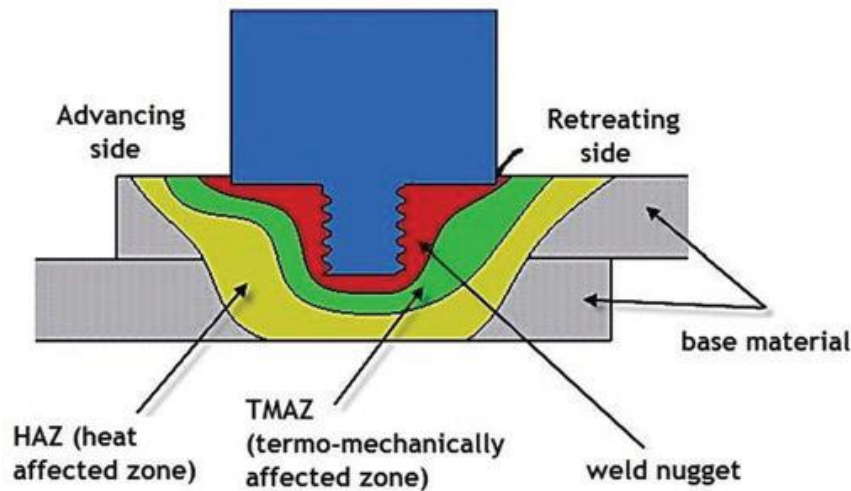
Weld zones in lap joint obtained from FSW process [64].
